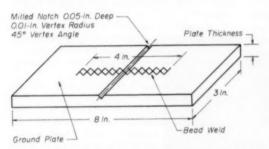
Kinzel Bend Test Specimen Indicates Behavior of Steel When Welded and Its Transition Temperature
